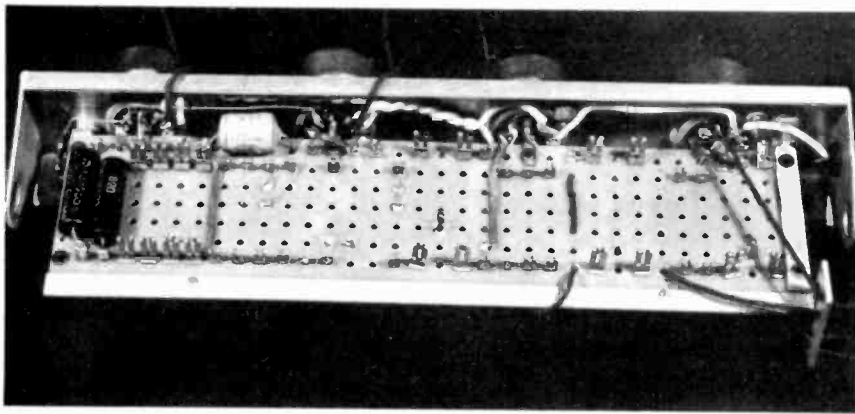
Resistor mounting card assembled in small chassis with four sockets attached. Terminal lugs may be staked into any desired holes in the board, and thus fit any circuit. Grid and input circuit components are on the top side; plate and decoupling components are located on the bottom.
